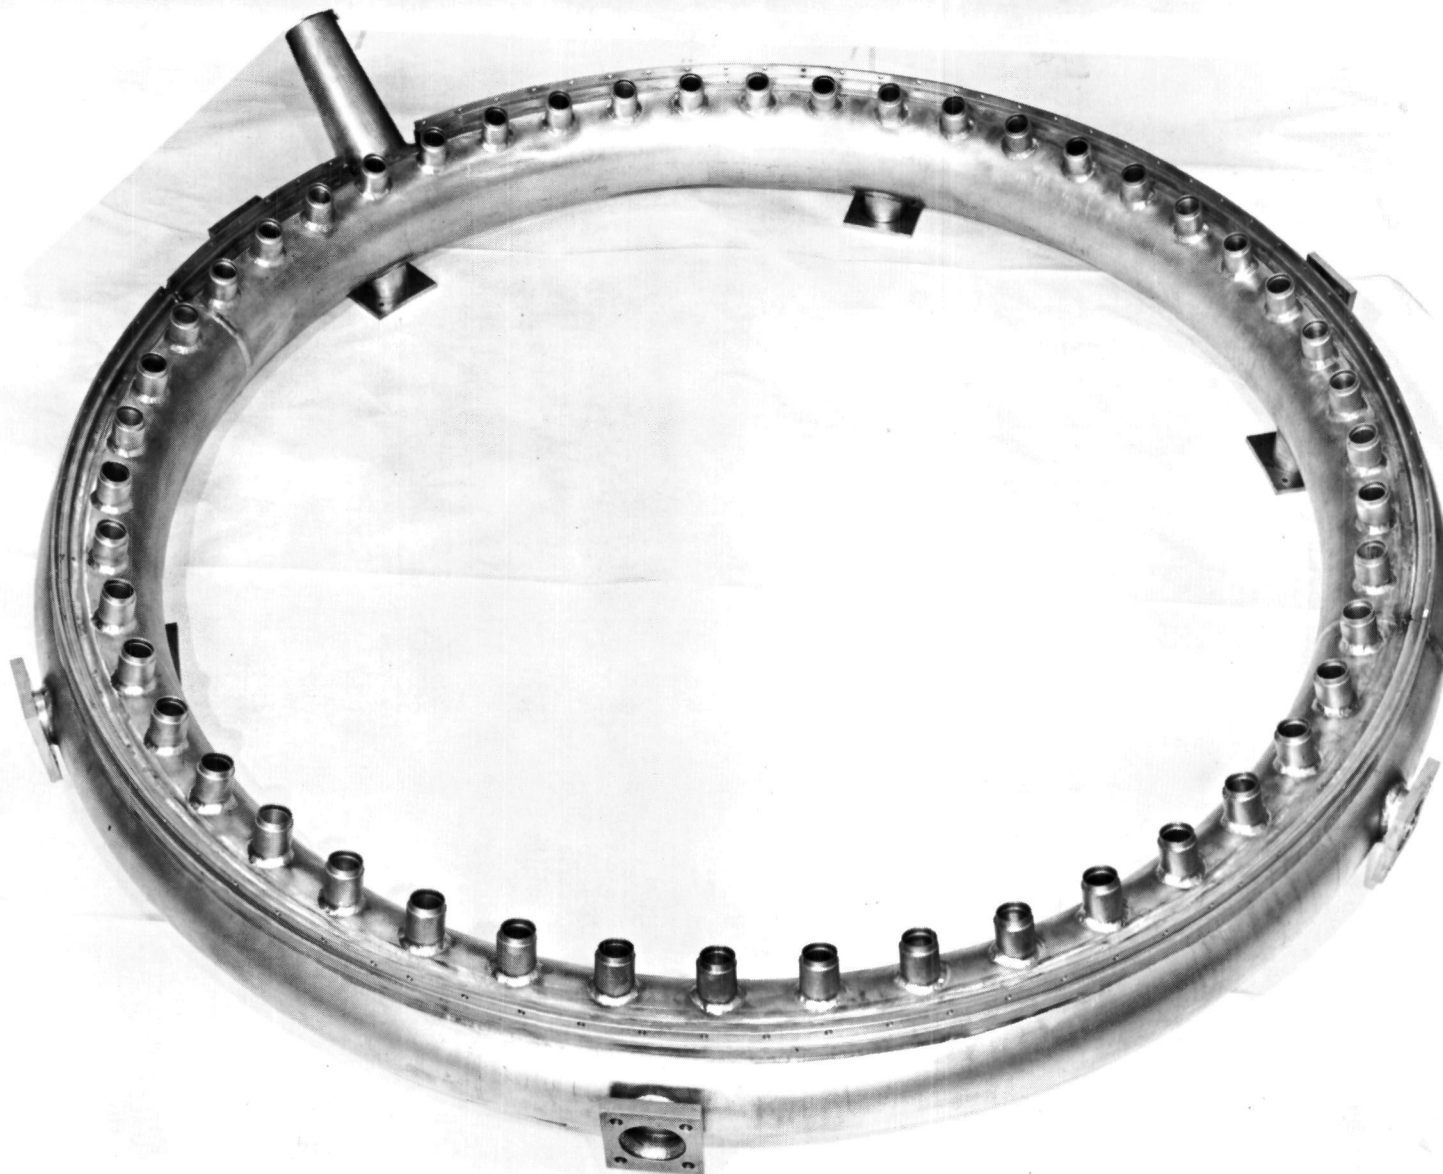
Inlet Manifold Ready for Gas System Assembly. (P69-9-17B)
